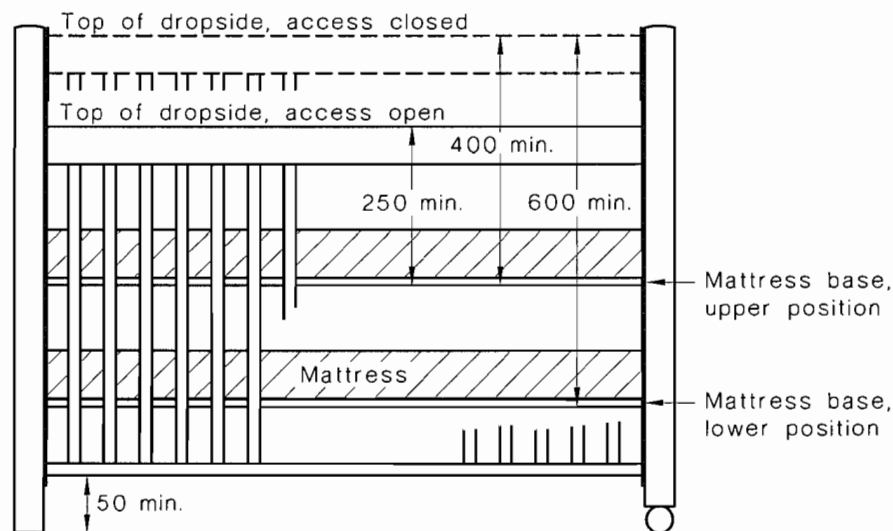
DIMENSIONS FOR ADJUSTABLE BASES
